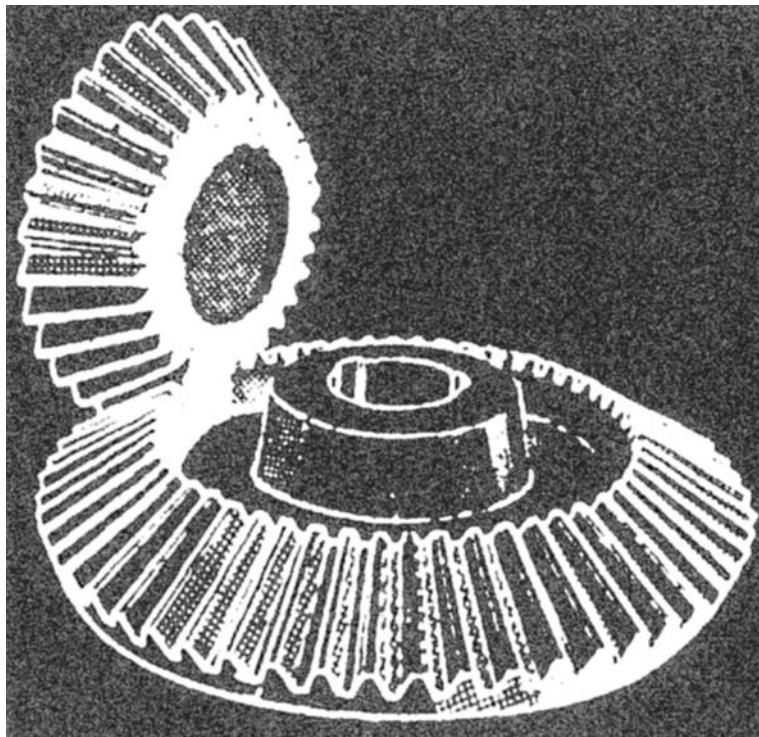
Straight bevel gears. (Courtesy of Lubrizol Corp.)
